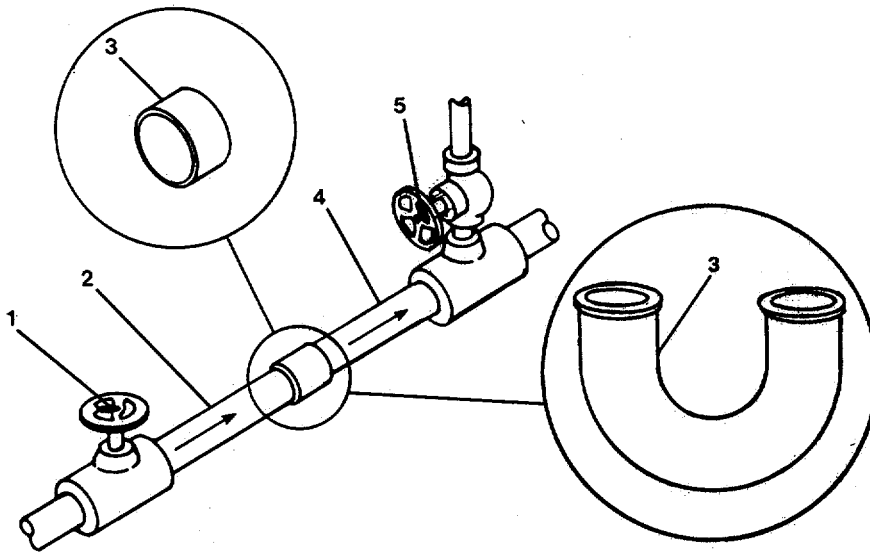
Repair Welded Fittings (Typical).
